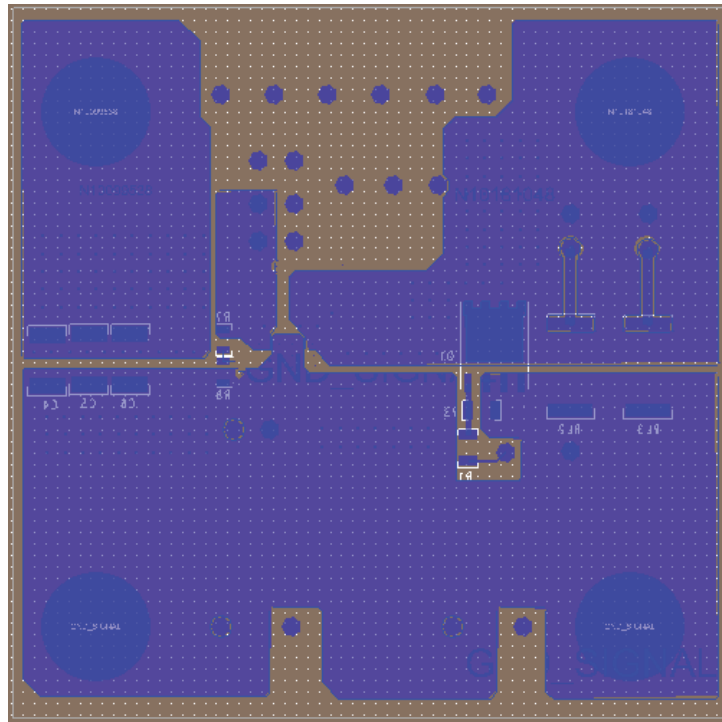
SIP3243xxEVB Board Bottom Layer
